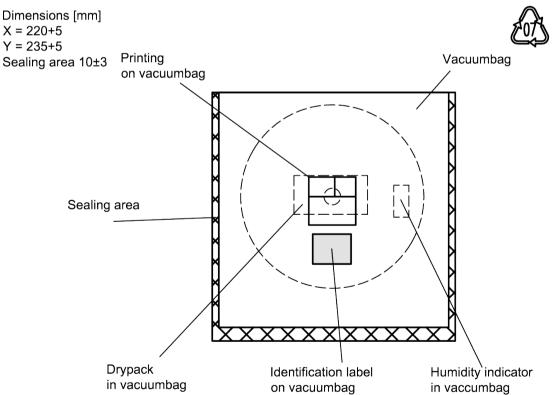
Drawing of moisture barrier bag (MBB) for reel with diameter of 180 mm.
